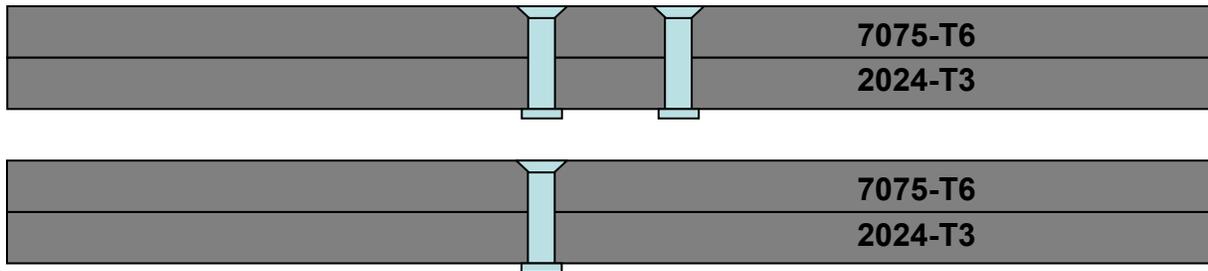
Countersink toward the welded side (Type B & C)
